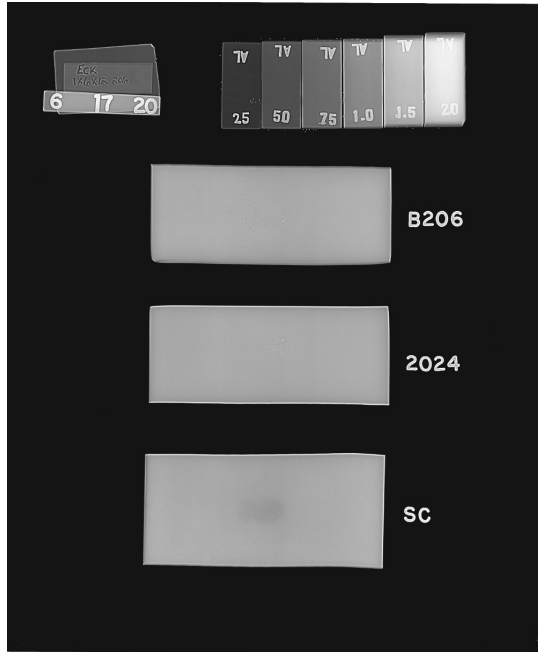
Weld cross-sections from unconventional weld fillers.
